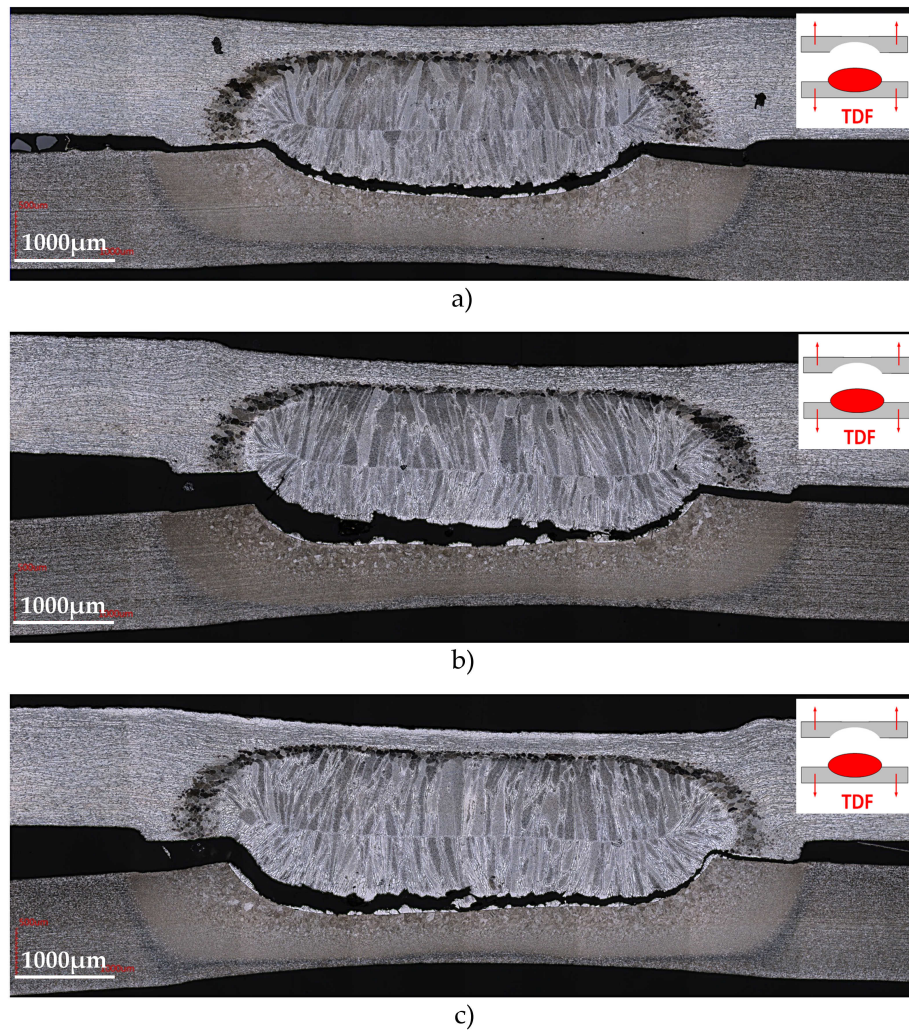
Spot weld Cross tension failure modes of Duplex 8Al/DP600 spot welds for the three welding intensities: a) lower end, b) middle position, c) upper end.
